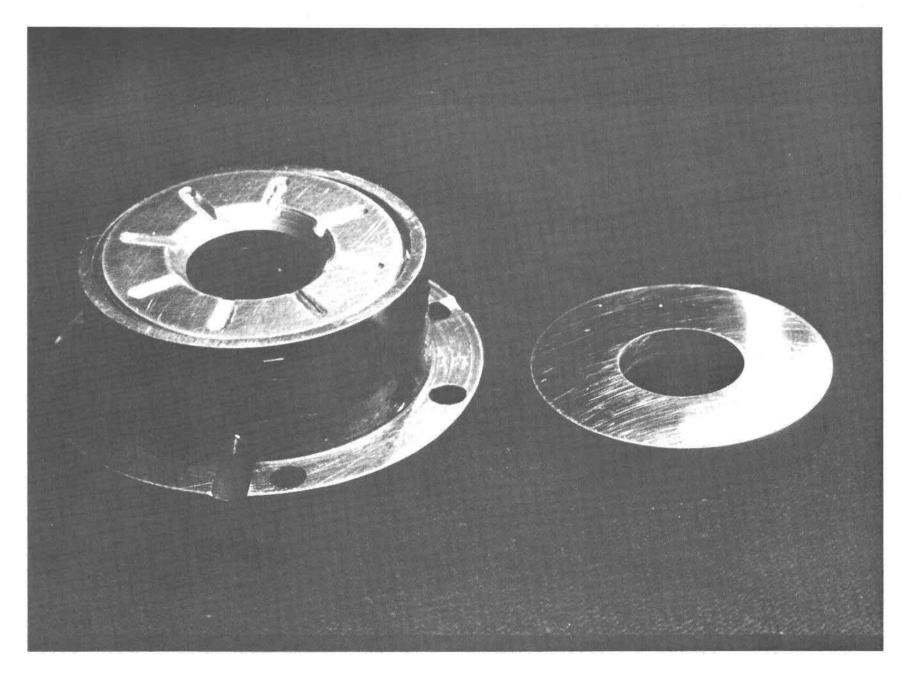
Thermal Wedge (Fogg) Turbine End Thrust Bearing (left) made of 52100 Steel with Flame-Sprayed Babbitt Surface and Thrust Runner (1.5-in. diameter) made of 17-4 PH Steel
